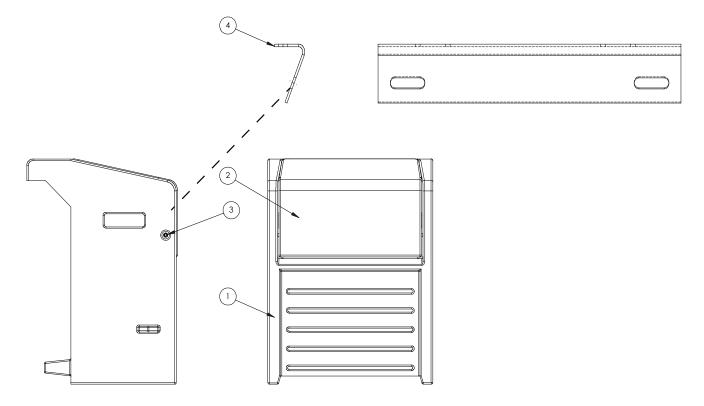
UL25/32/40 outrigger assembly illustration.
